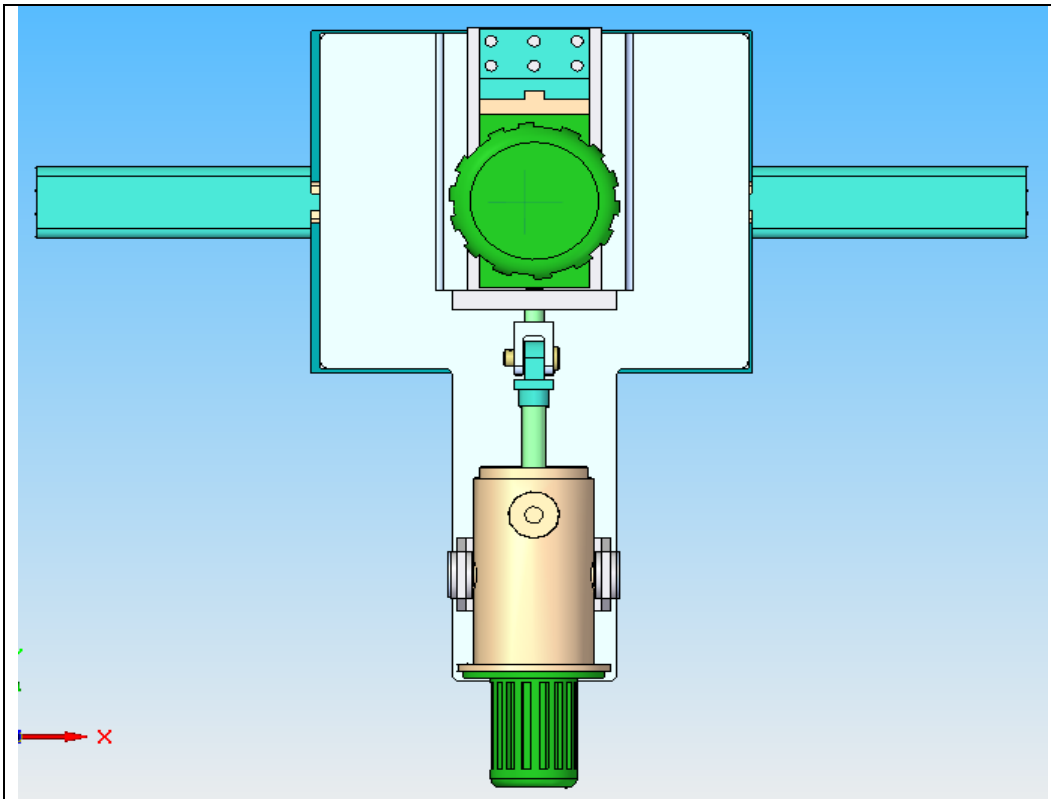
Side view of proposed friction stir welding machine
